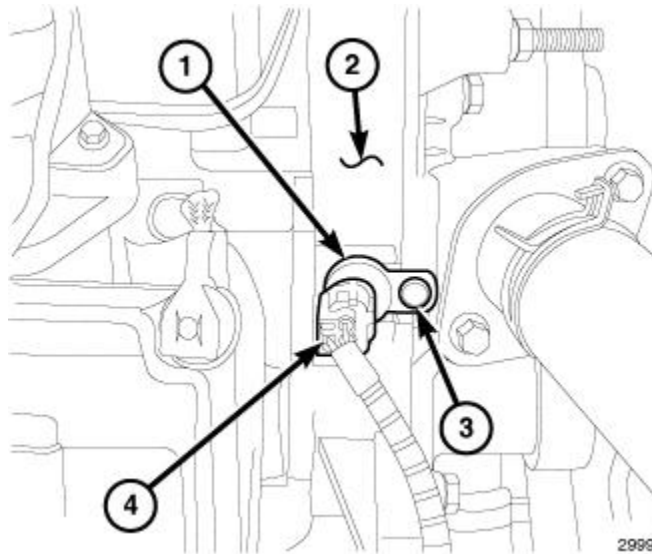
Camshaft Position Sensor, Connector, Bolt & Timing Cover
